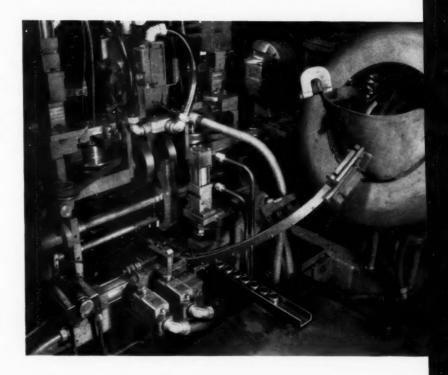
Close-up of unloading end of the machine seen in the heading illustration for automatic assembly of rollers and dust caps in universaljoint needle bearings.
